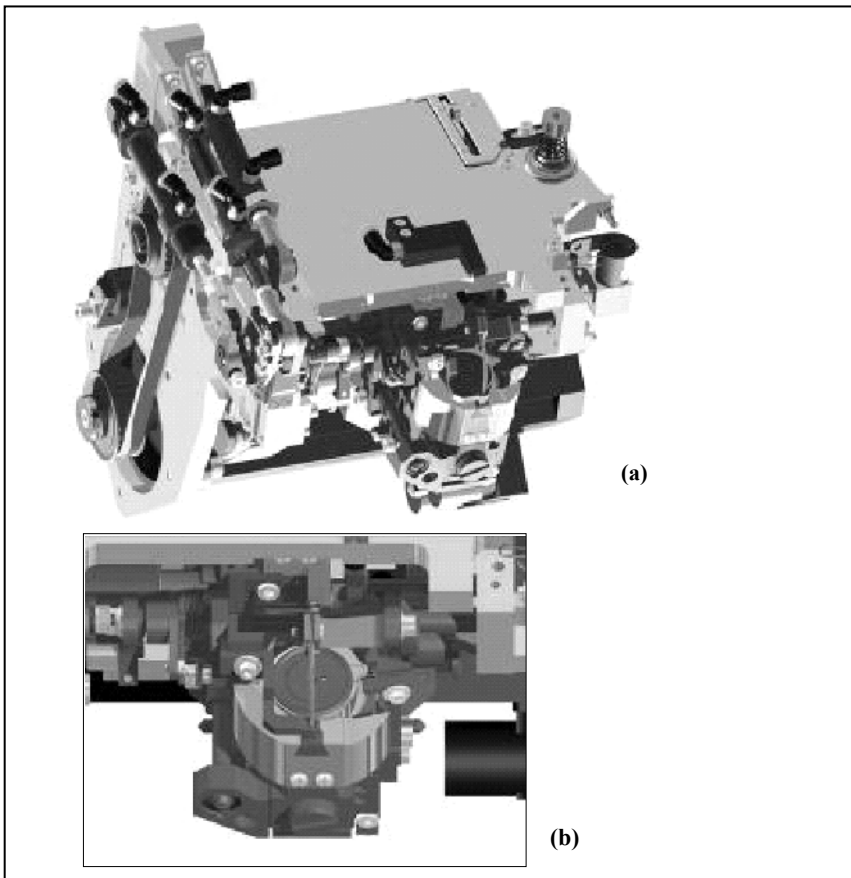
Miniaturised robot sewing machine and tools /Philipp Moll GmbH & Co KG/ (a) Miniaturised robot sewing machine /moll/, (b) Sewing tools of robot sewing machine /moll/
